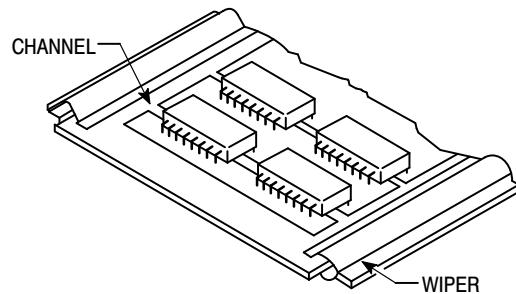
Channel/Wiper Heatsinking on Double Layer Board
